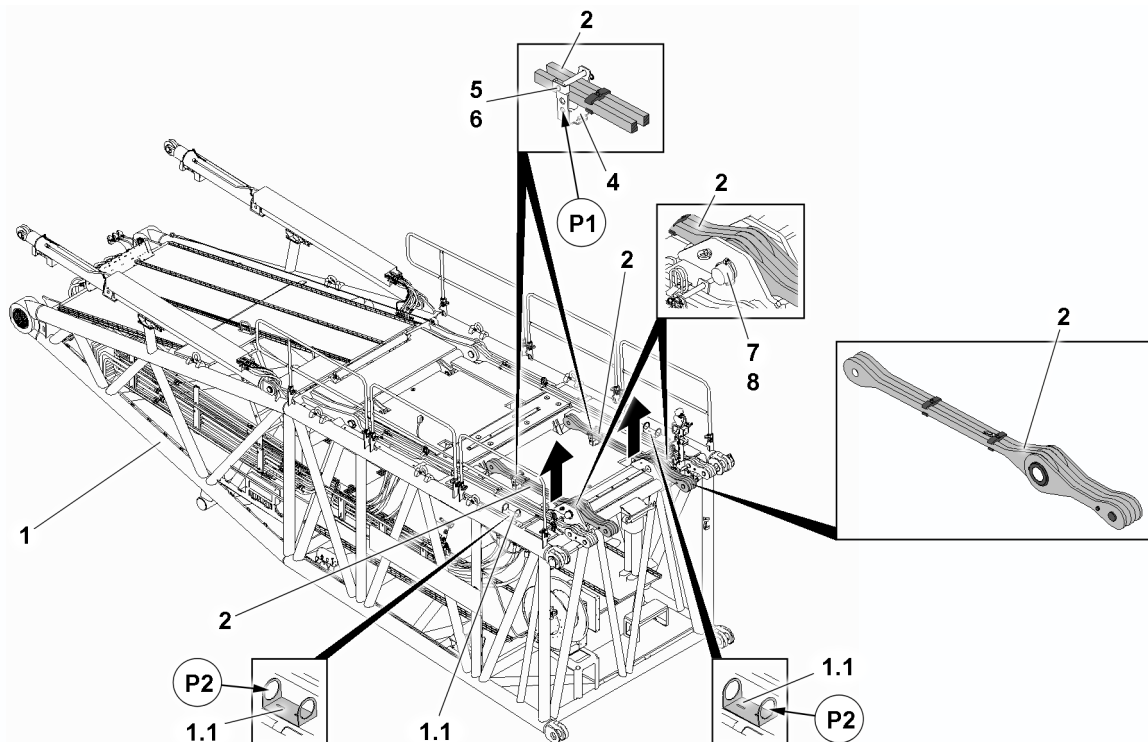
Disassembling the H-guy rods 2 on the H-pivot section 1
